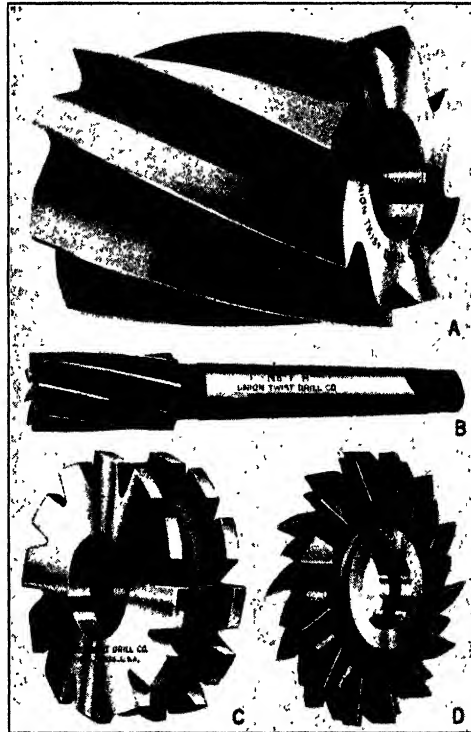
Milling cutters. (Courtesy Union Twist Drill Co.)
